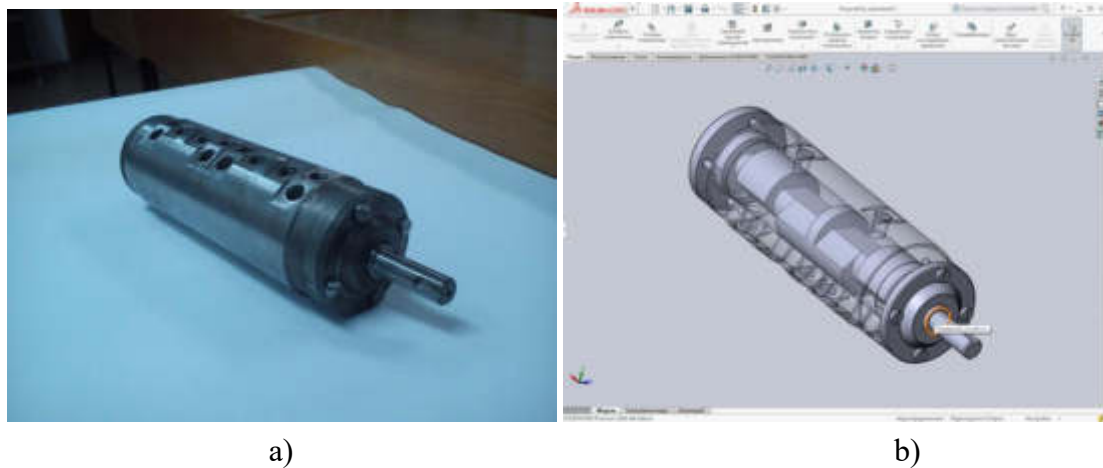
Hydraulic distributor for pleating machine (a), and its model developed in SolidWorks (b)
